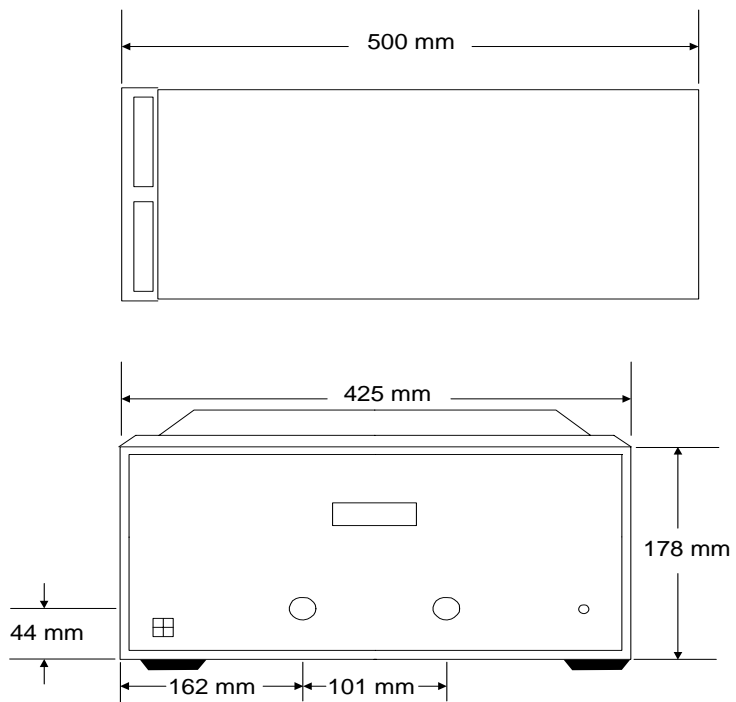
Agilent Z5623A Option K01 Physical Dimensions
